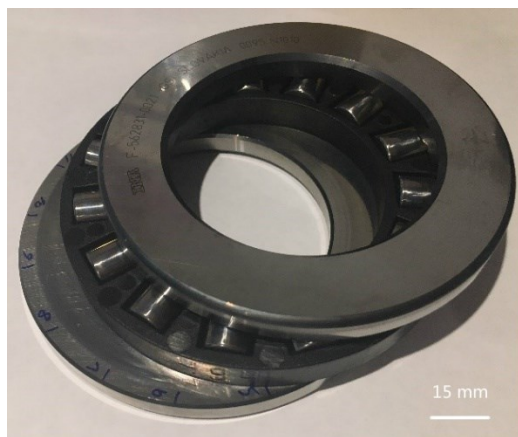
Image of the cylindrical roller thrust bearings of type F-562831.
